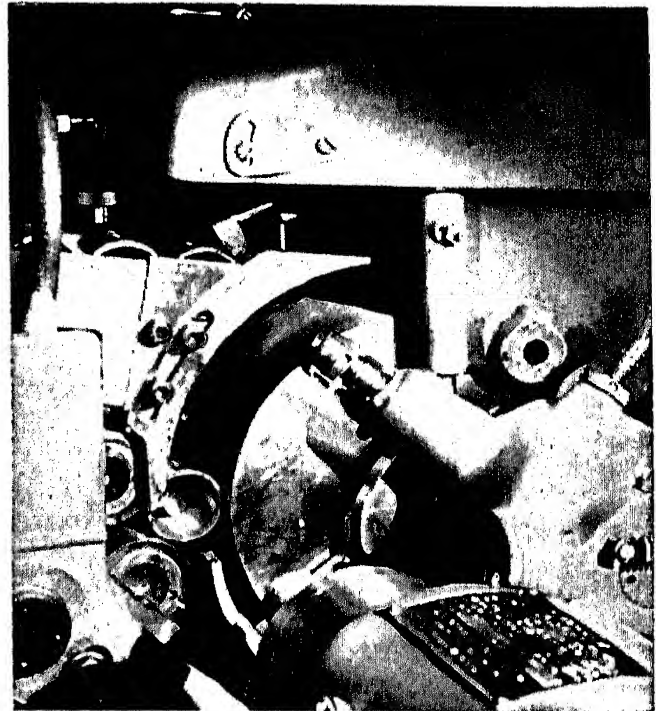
A view of a centerless internal grinding machine. (Courtesy The Heald Machine Co.)
